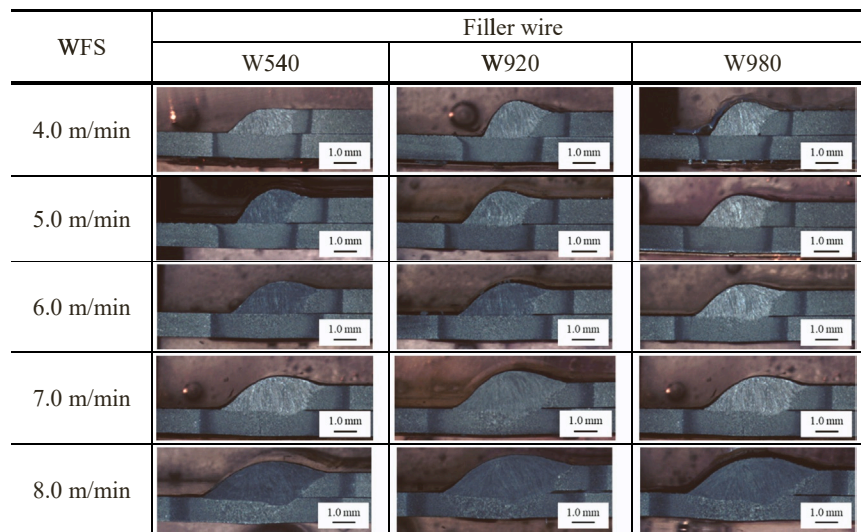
Cross-sectional images of GMAW welds depending on filler wires and WFS.
